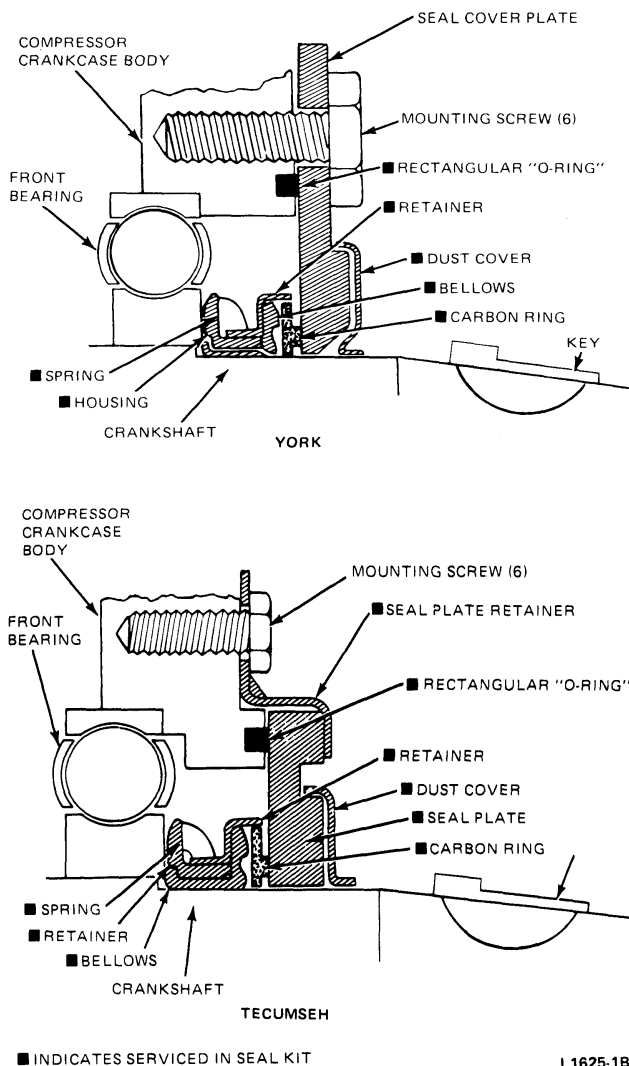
Compressor Oil Seal—Cross-Sectional View
